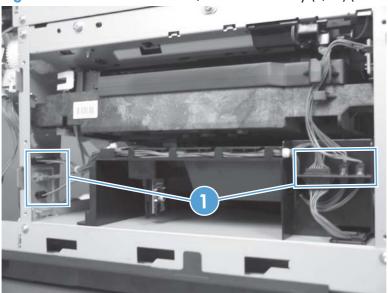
Remove the laser/scanner assembly (Y/M) (6 of 12)
